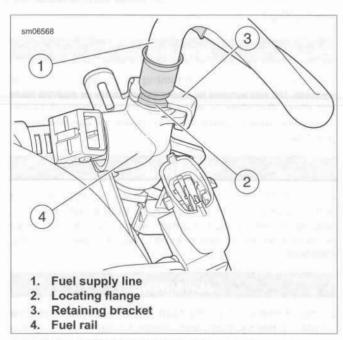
Mounting Fuel Hose and Fuel Rail
